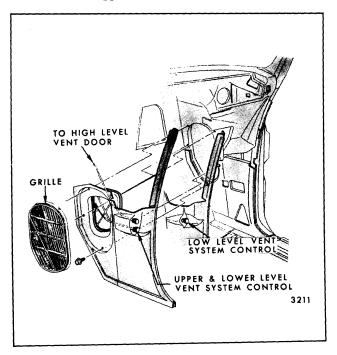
Shroud Side Finishing Panel - "A, G, B, C, X" and "Z-37" Styles
